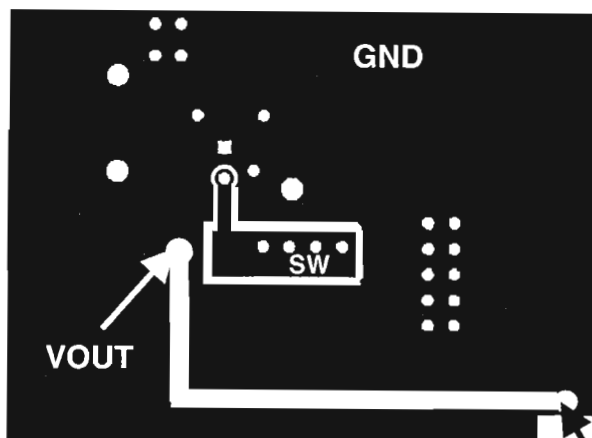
BD6061GUT Rear surface (TOP VIEW)
